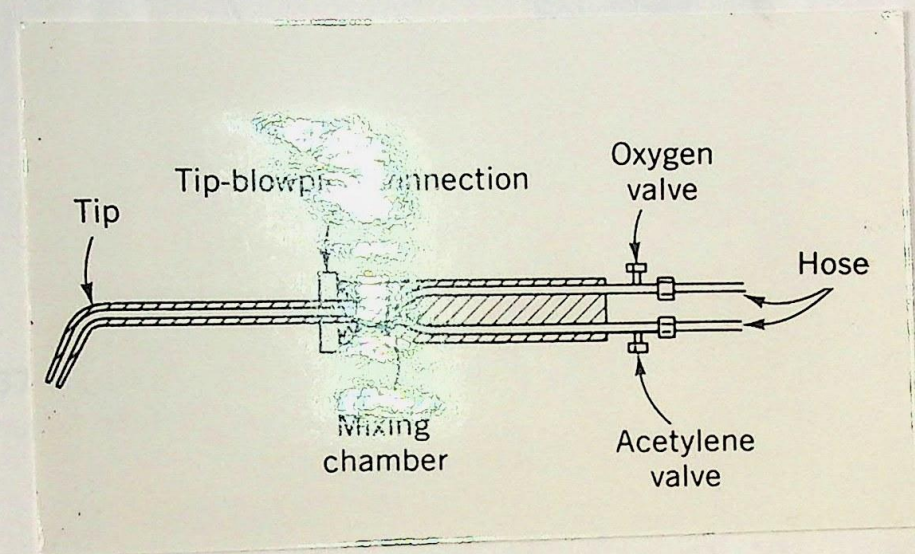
Schematic drawing of oxyacetylene welding torch.
